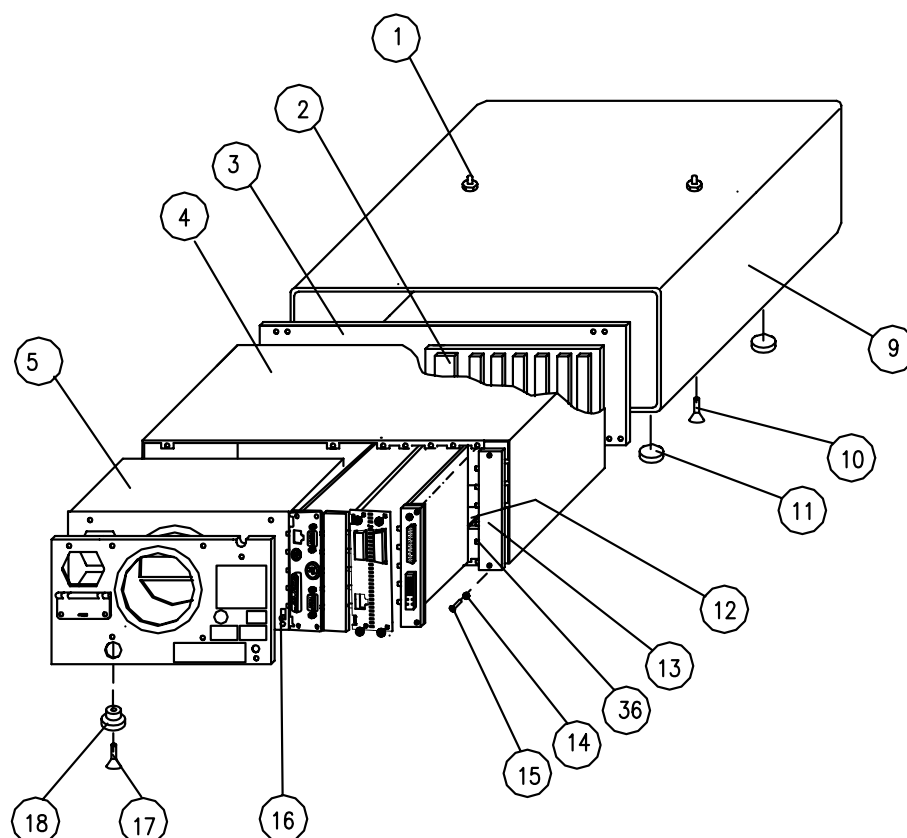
Exploded view of the Central Unit F-CU8 (-12)
